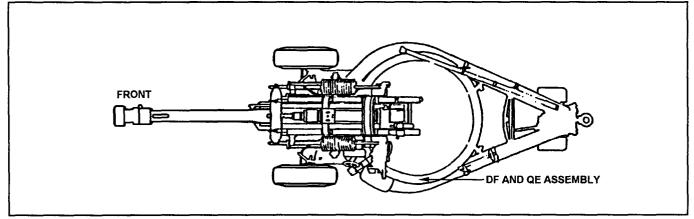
Gun assemblies on M119A1 105-mm howitzer
